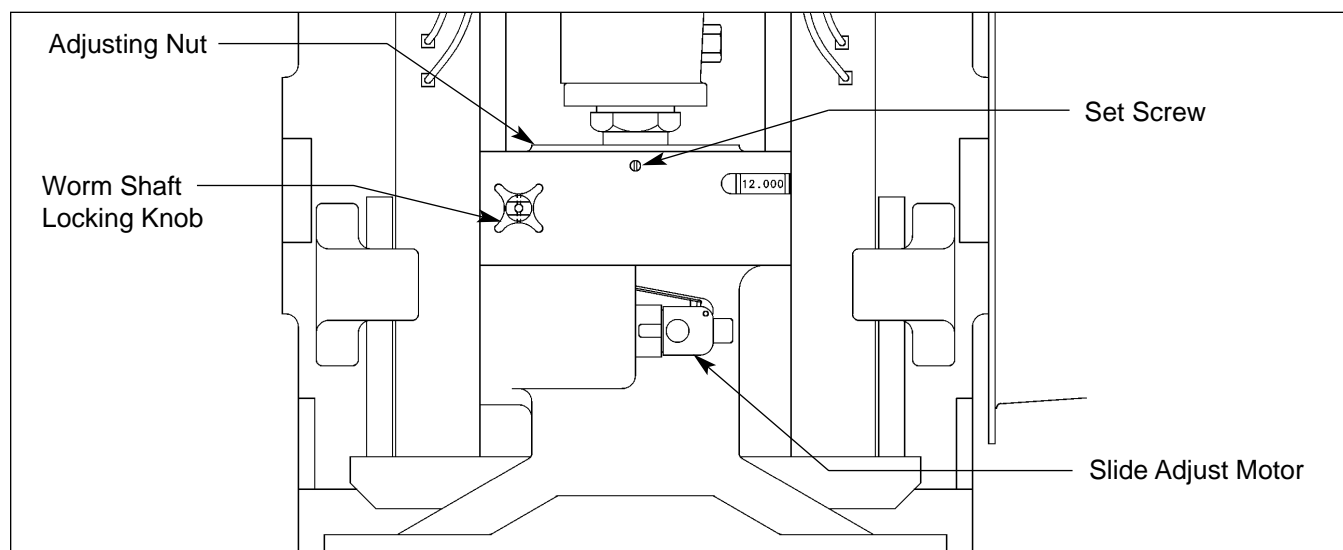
F. Setting ball box clearance (motorized adjust shown.)
